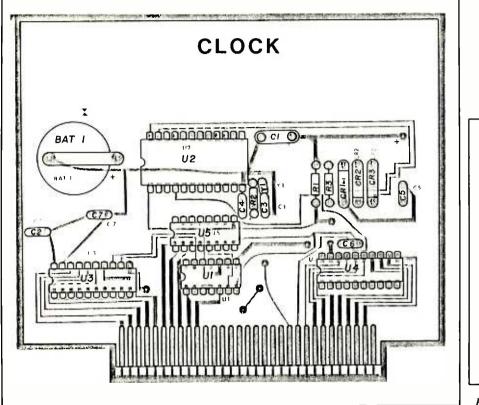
Wiring guide for pc card. Use this as a rough guide to wiring circuit on perforated prototyping board (see text).
